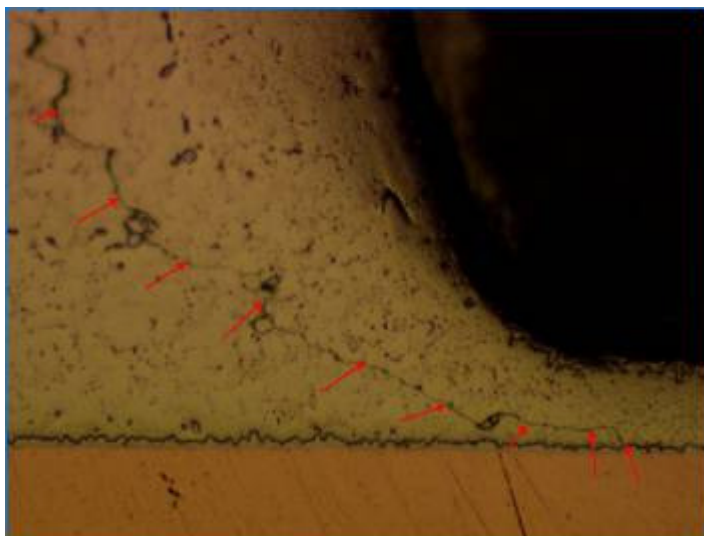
cross section, SN63, U52, left pad solder crack, 400x
